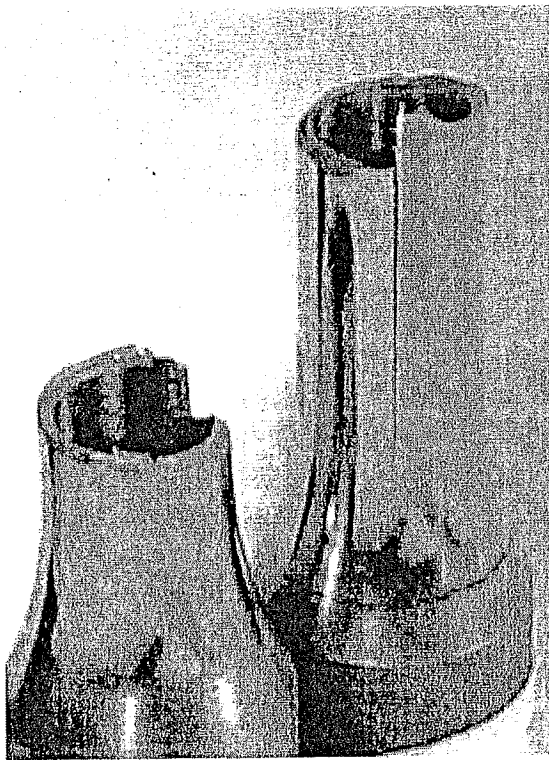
Fractured specimen with longitudinal crack (specimen T 7, $N_f = 1,051$)
